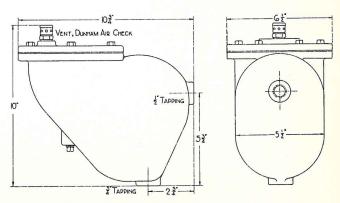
FIG. I. AIR ELIMINATOR and AIR CHECK DIMENSIONS
